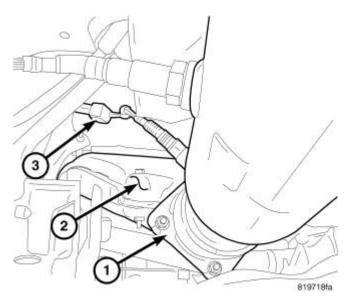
Exhaust Manifold Heat Shield & Bolts Courtesy of CHRYSLER GROUP, LLC
